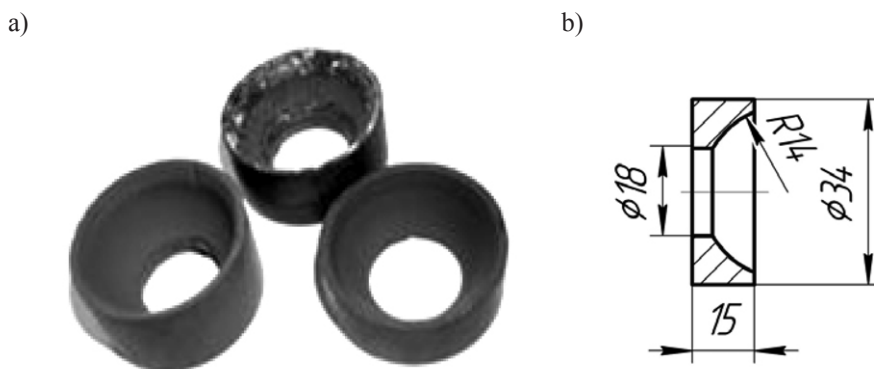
Laps for processing of titanium workpiece: a) photographs of the tools, b) technical drawing of the tool
